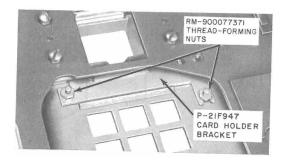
Card Holder Bracket Installed (TOUCH-TONE Set)
